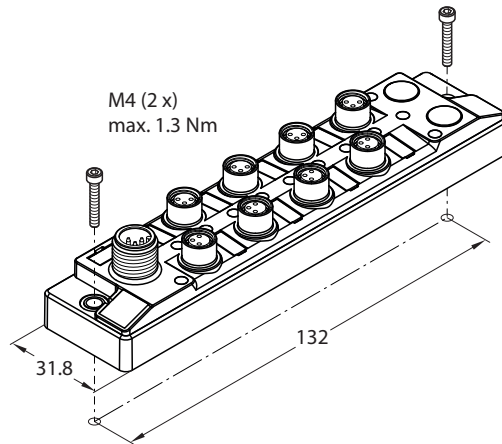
Mounting the device to a mounting surface (example: MD 742-...)
